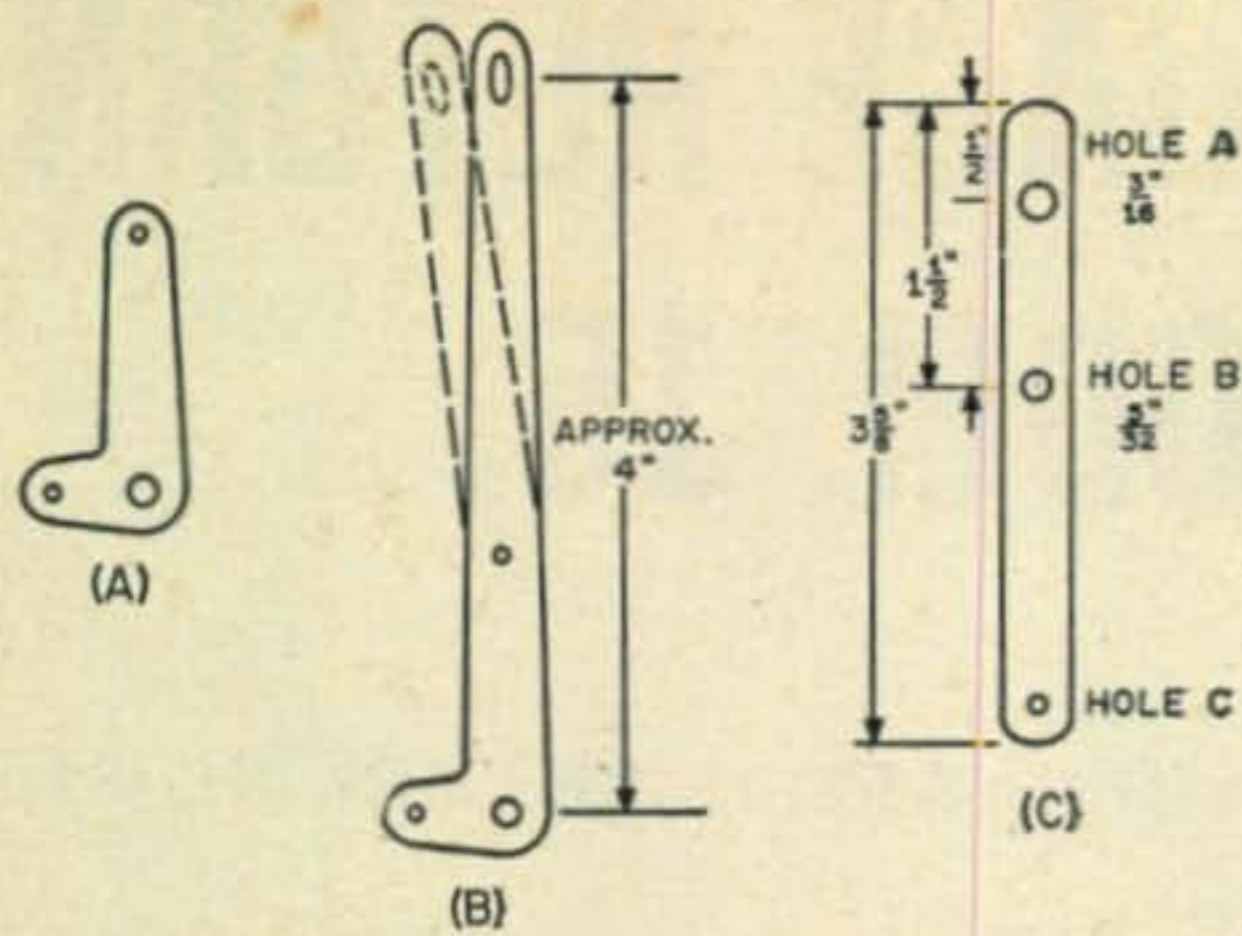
Lever arm dimensions for (B) Carriage Return lever and (C) Line Feed lever arm. Both arms are fabricated from 1/16" stock (#16 gauge). The Latch Bell Crank (A), part #74121, is removed from the printer and used as a template for the bottom end of lever (B). The exact tilt of the upper portion of the Carriage Return lever may vary according to the solenoid used, as shown by the dotted portion.
